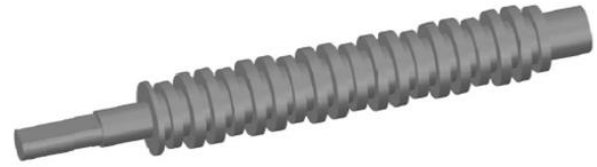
Isometric view of the 4 mm flat noodles cutting shaft
